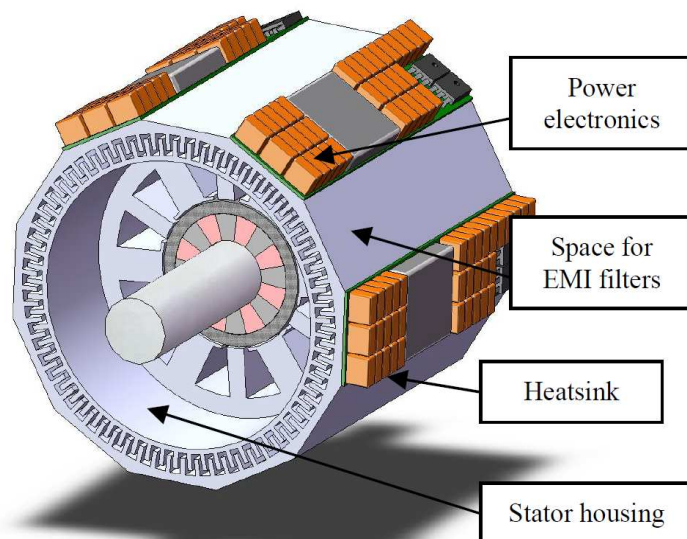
Integrated power converter and machine having spacer tooth [36]
